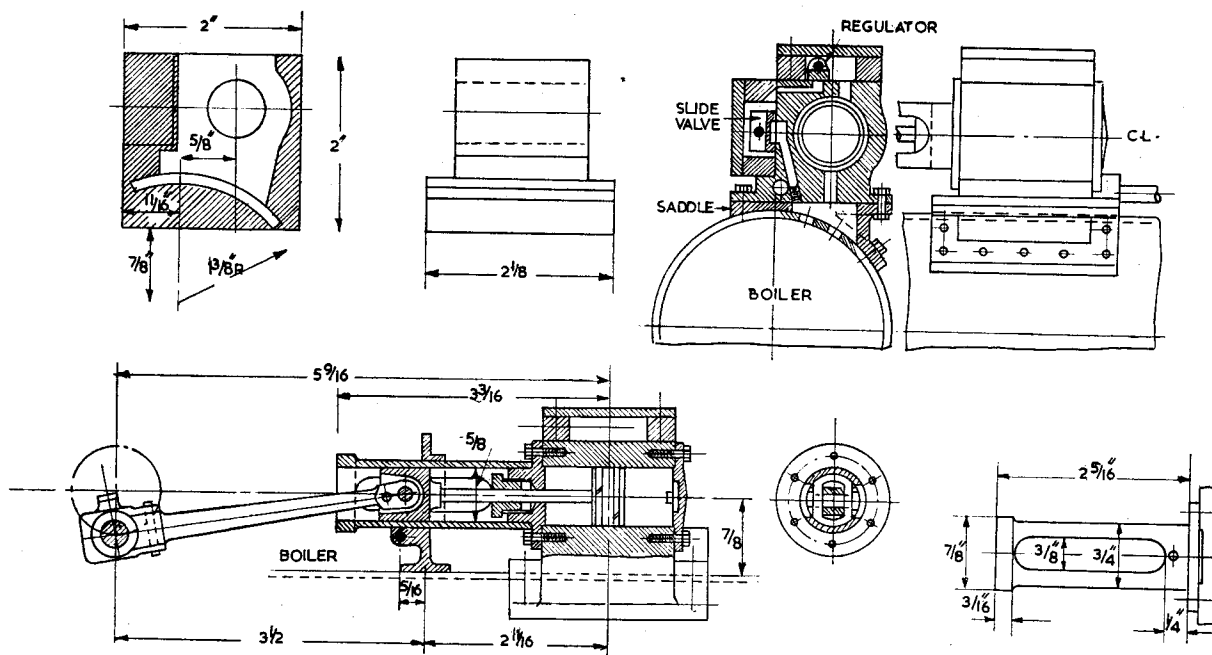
Cylinder block machined out of stock bar. Fig. 5: Cylinder mounted on saddle. Fig. 6: Tubular guide for crosshead. Fig. 7: Detail of guide
